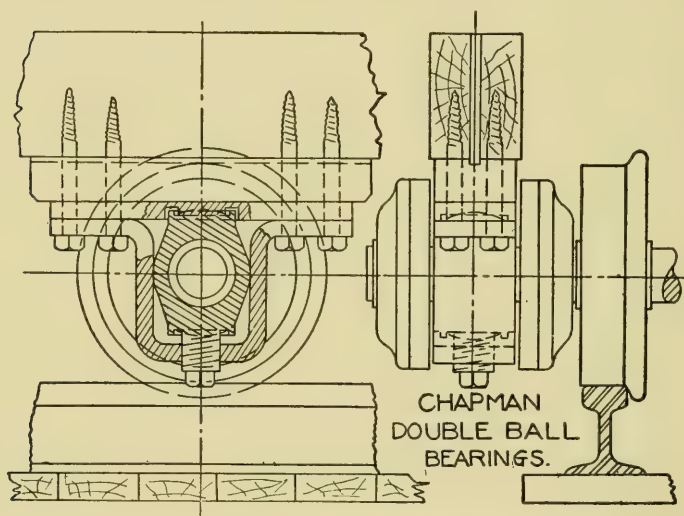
Sketch Showing Details of Mounting Chapman Double-Ball Bearings.
